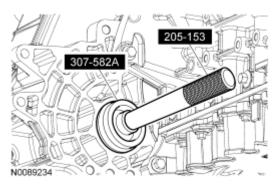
installing RH Halfshaft Seal Courtesy of FORD MOTOR CO.
